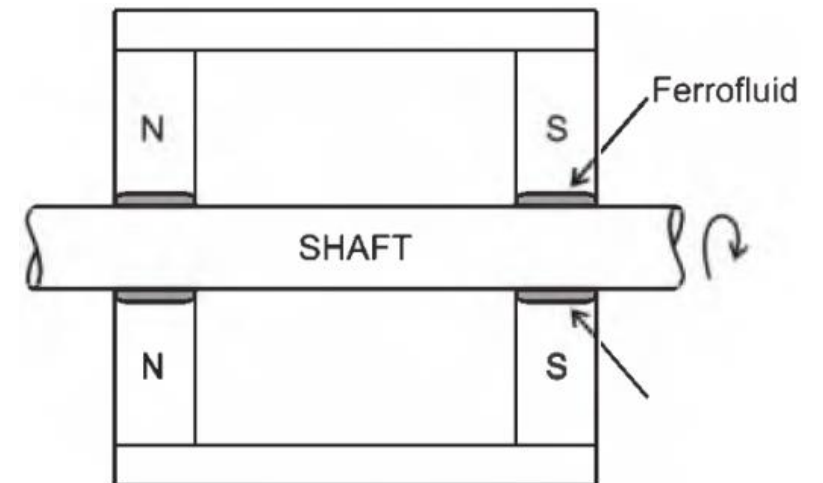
Ferrofluid as bearing for a rotating shaft.
